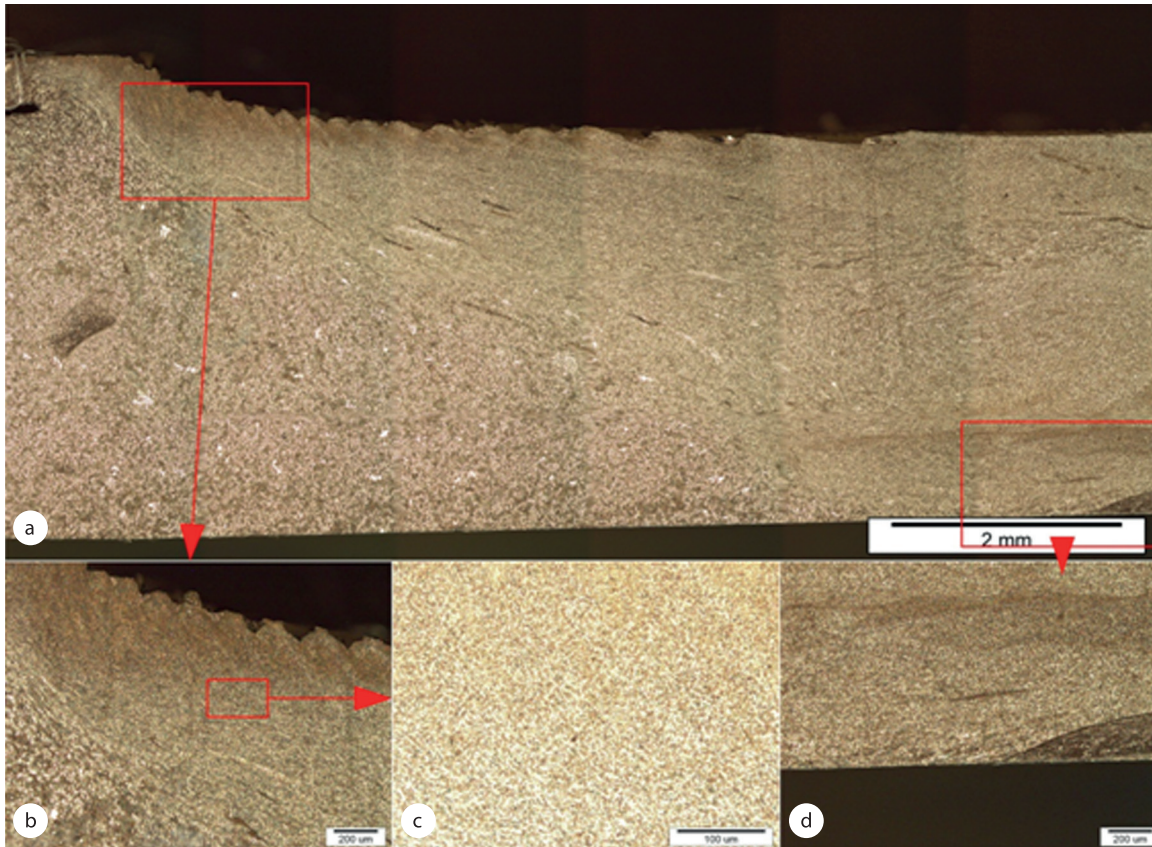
Microstructure (polarised light microscopy images) of FSW weld produced at 1 180 r/min RPF = 3.11 r/mm (sample 7): a) weld with HAZ and base alloy, b) weld apices and HAZ, c) weld and d) weld root.
